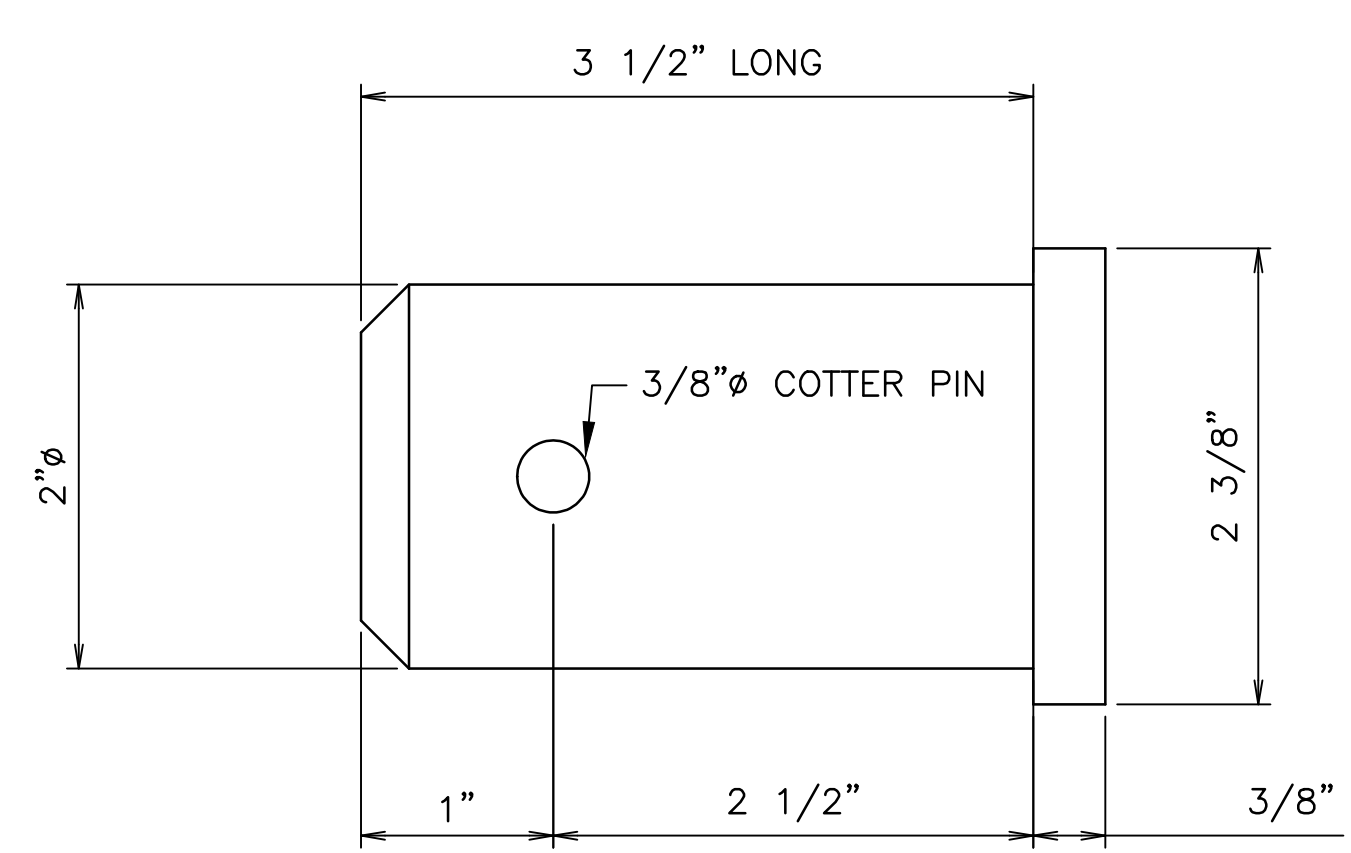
TYPE 2 STRUT PIN CONNECTION
